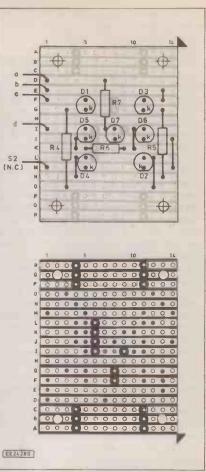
Display board component layout and details of breaks required in the underside copper strips.
